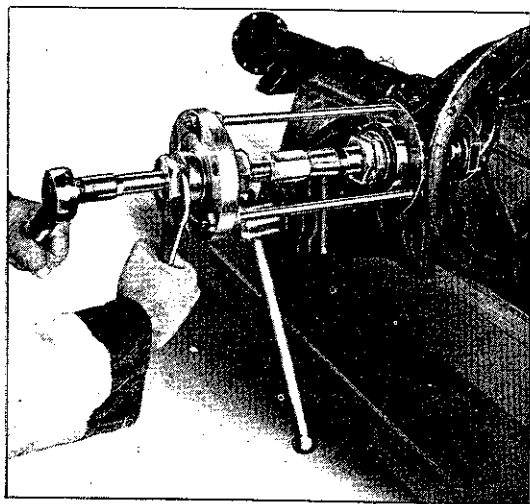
PINION AND BEARING REMOVER AND REPLACER
